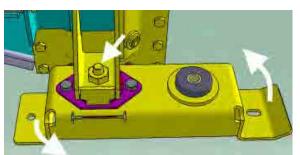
MOUNTING SUPPORT IN INITIAL POSITION
